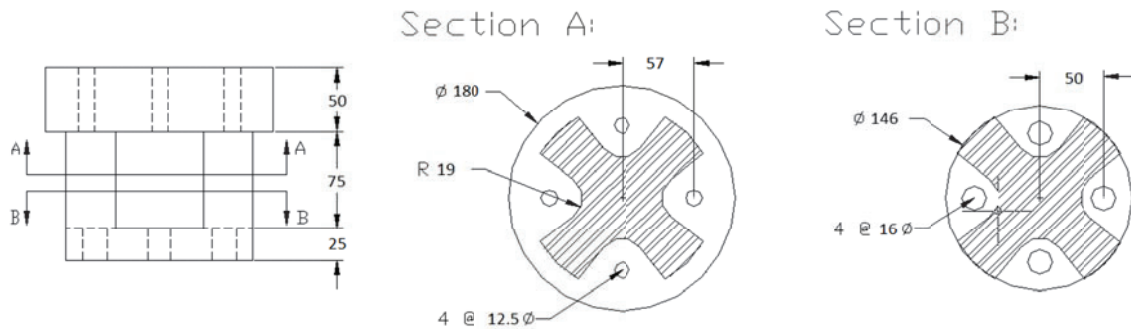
Schematic of the bottom testing fixture (dimensions in mm)
